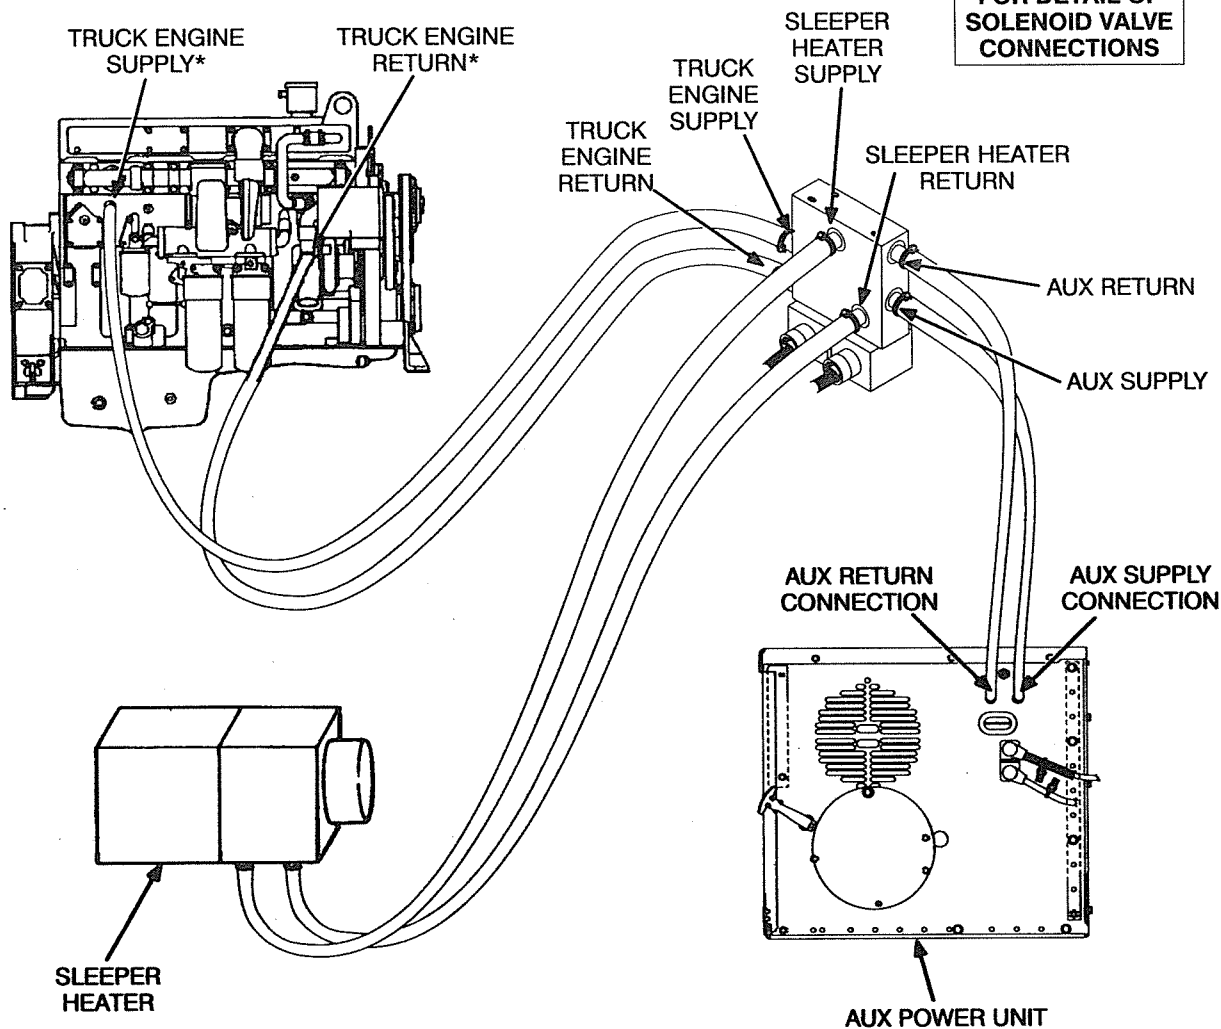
SOLENOID VALVE ASSEMBLY HOSE CONNECTIONS
